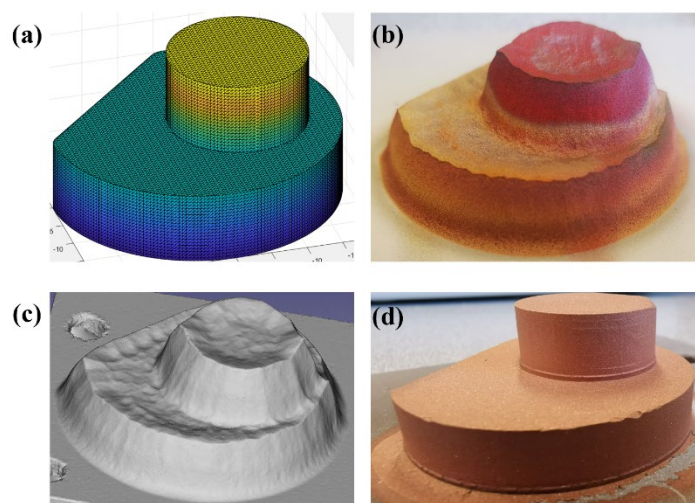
Data postprocessing process: (a) 3D model of the workpiece to be manufactured; (b) the manufactured deposit; (c) 3D model of the deposit built by reverse engineering; (d) deposit after physical postprocessing
